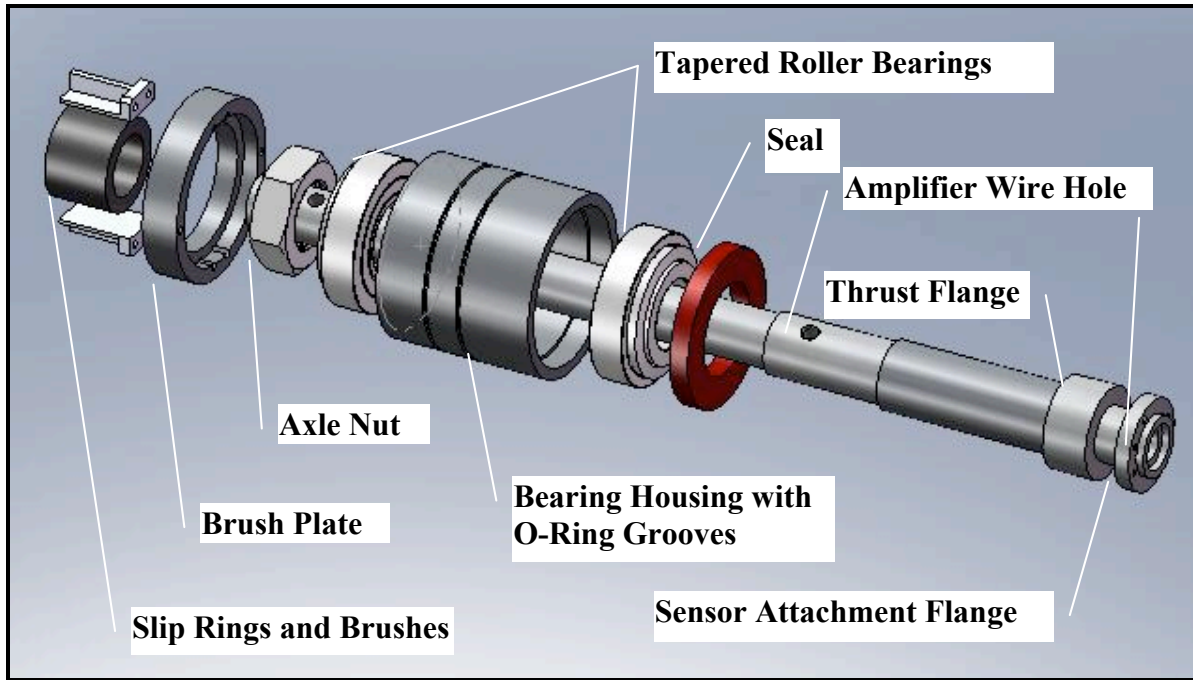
Driveshaft and Bearing Assembly with Brush Blocks and Slip Rings
